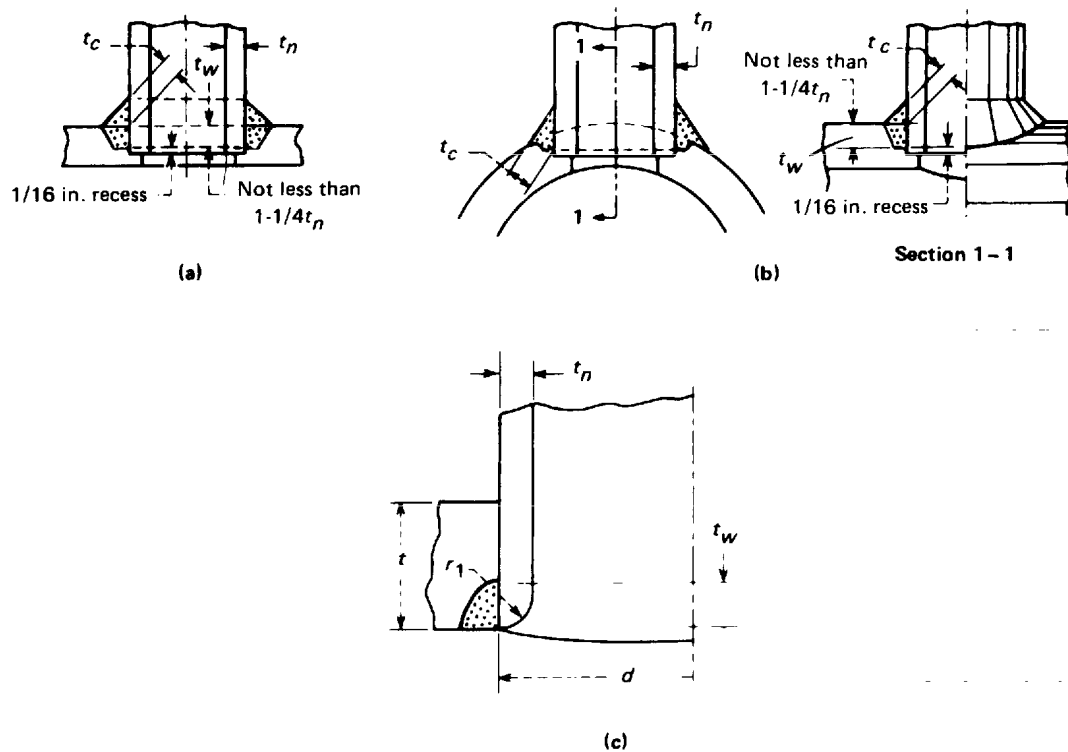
(d)-1 PARTIAL PENETRATION WELD CONNECTIONS
